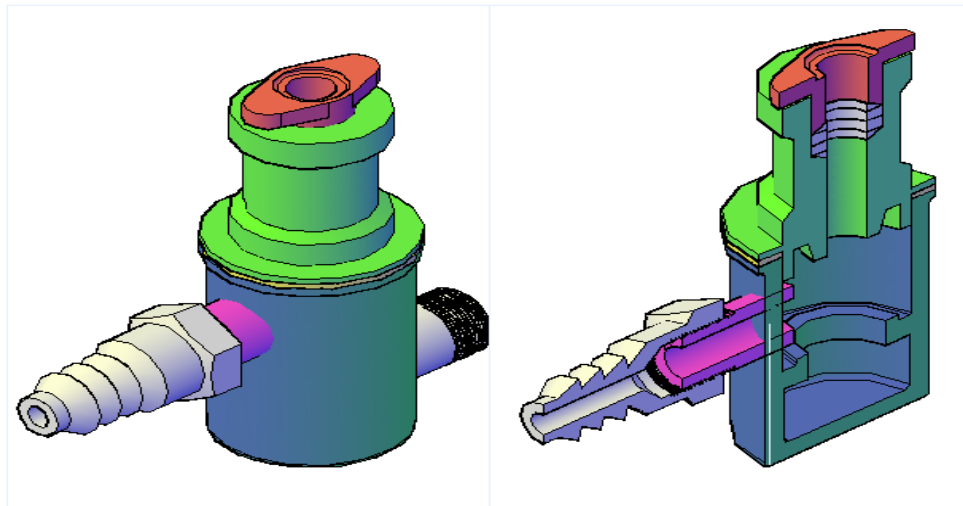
Views of virtual detail and visualized cuts and sections of the assembly unit drawing in science.
